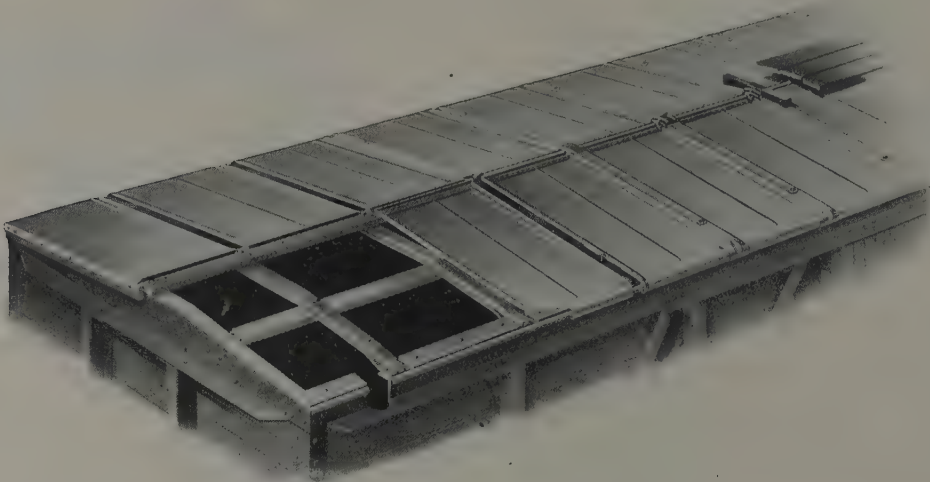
Hutchins All-Steel Steel Carline Roof Applied to Steel Frame Car. Hutchins Car Roofing Company.
